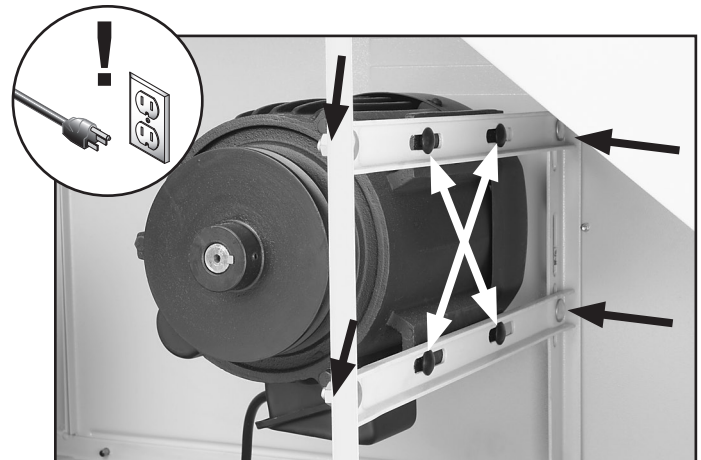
Motor bracket fasteners (black arrows); motor mount fasteners (white arrows).
